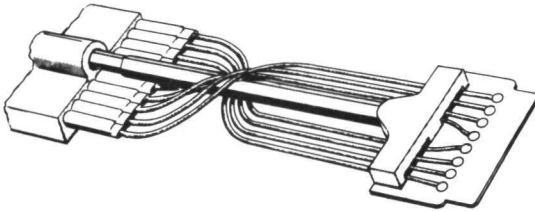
List of Recommended Special Tools (Sheet 2)
